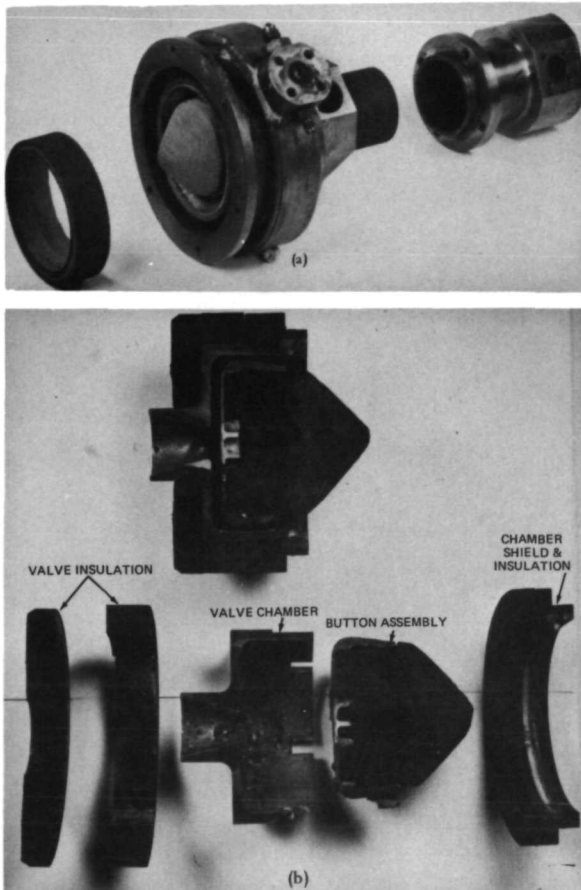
Vortex valve for controlling solid rocket motor thrust. (a) Post-test partial disassembly of a hot gas vortex valve; (b) hot gas vortex valve post-test section.
